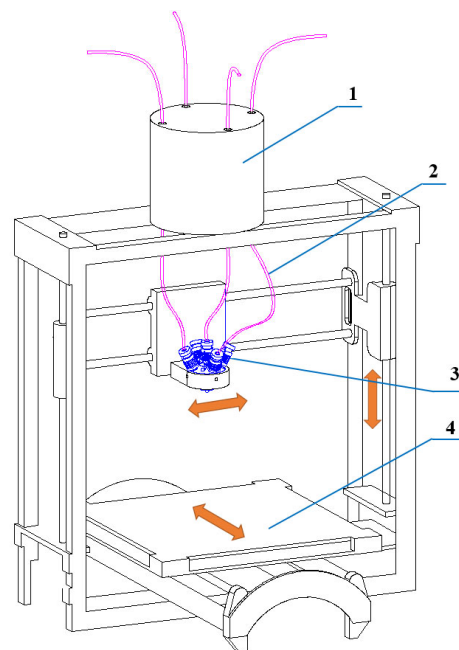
Illustration of the multicolor 3D printer concept; 1—Filament shifting device; 2—Filament; 3—Printing head including 5-to-1 nozzle; 4—Mobile printing support.
